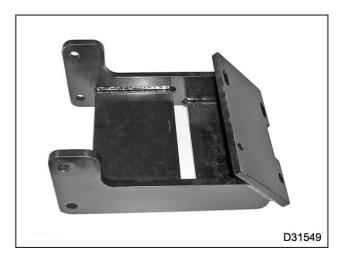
Engine Stand Mounting Bracket ZTSE4507
